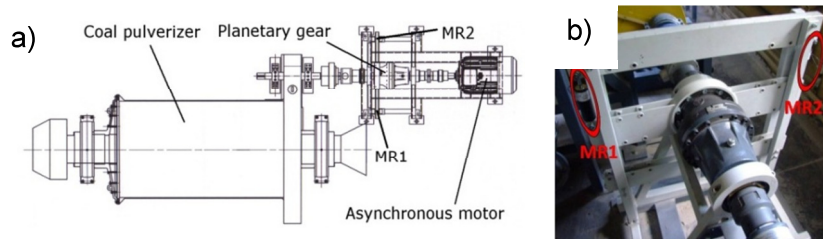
(a) – Scheme of the of the coal pulverizer drive system, (b) – planetary gear support frame with two MR dampers mounted
